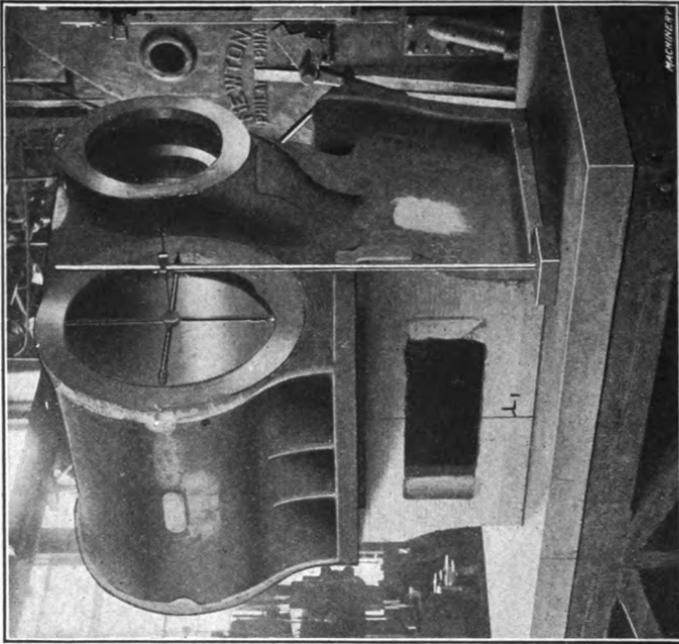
Another View of Cylinder on Testing and Laying-out Plate
